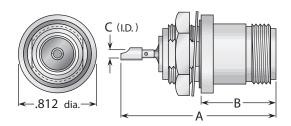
(Front mount, hermetically sealed, with mounting gasket)
